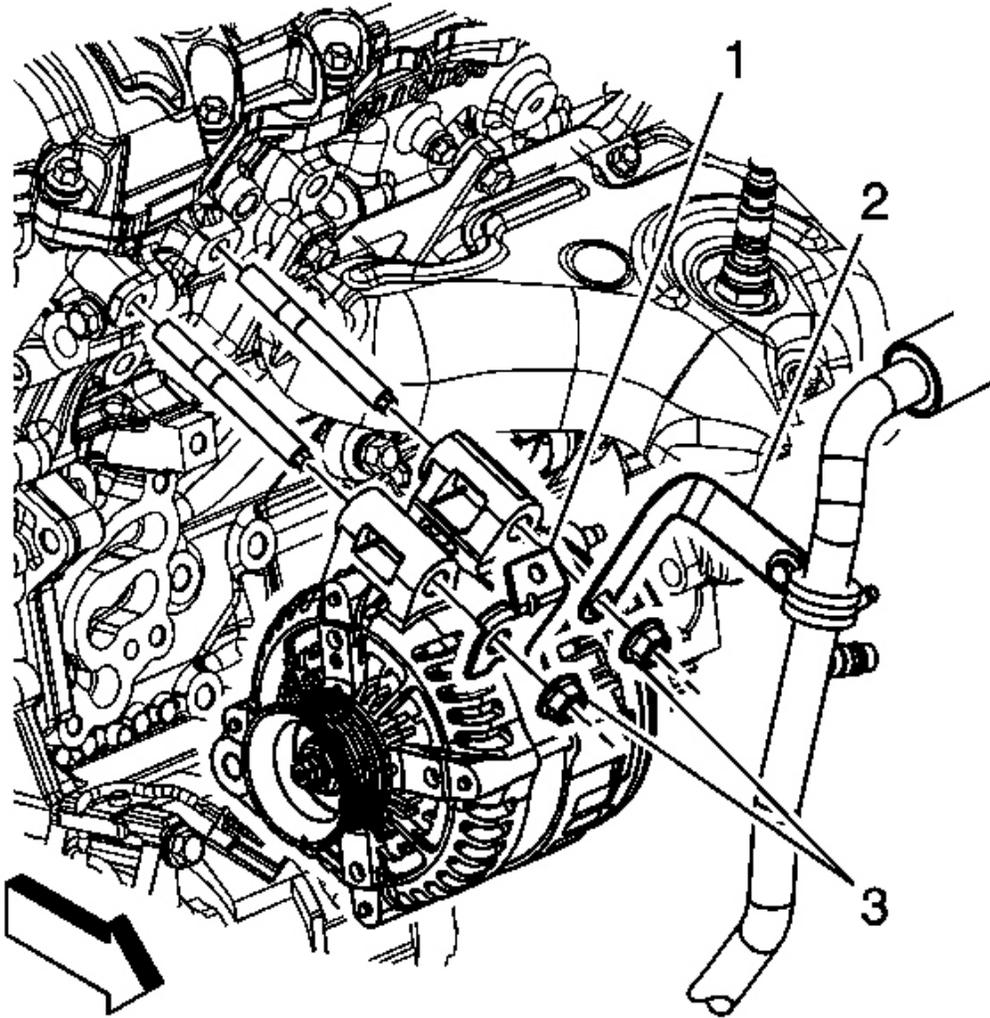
Identifying Power Steering Reservoir Inlet Hose Clip & Hose Clip Bracket
